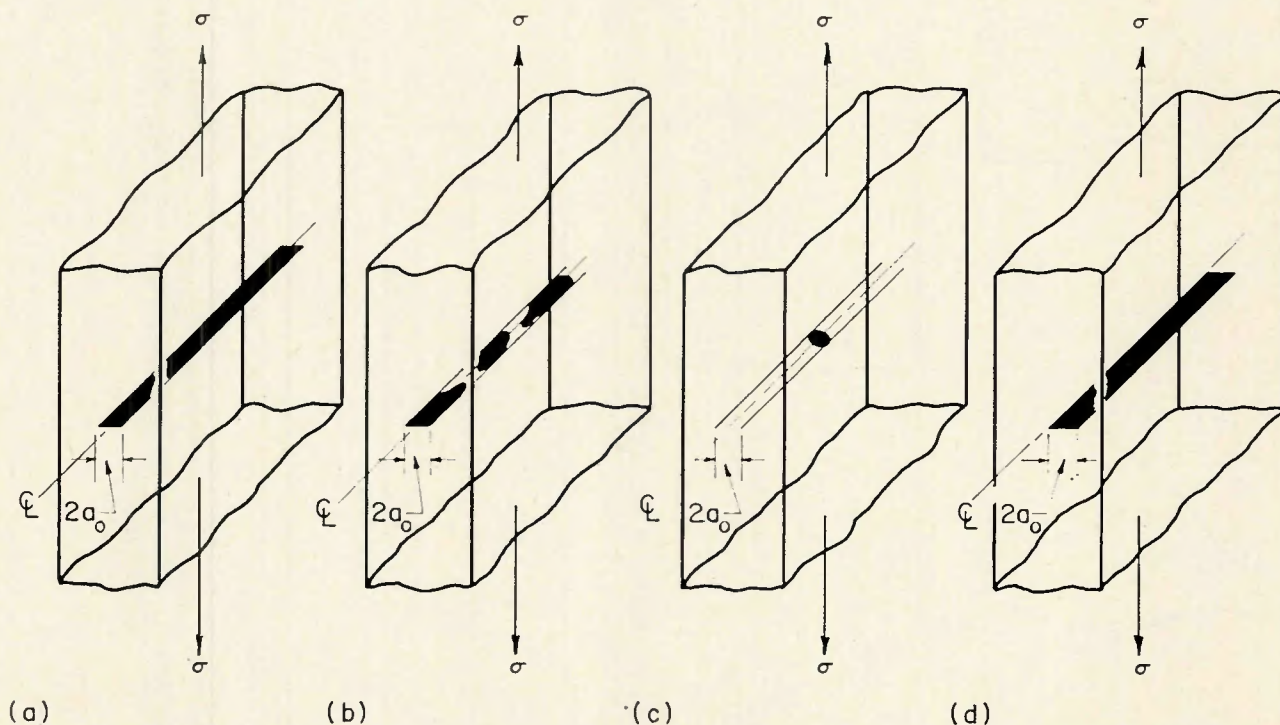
Types of flaws found in weldments: (a) continuous linear defects at the center of the weldment, e.g., lack of fusion, continuous slag; (b) intermittent linear defects at the center of the weldment, e.g., intermittent lack of fusion, intermittent slag, elongated porosity; (c) isolated pores at the center of the weldment, e.g., small voids, pores, very small defects of all kinds; (d) continuous linear defects located off center in the weldment
